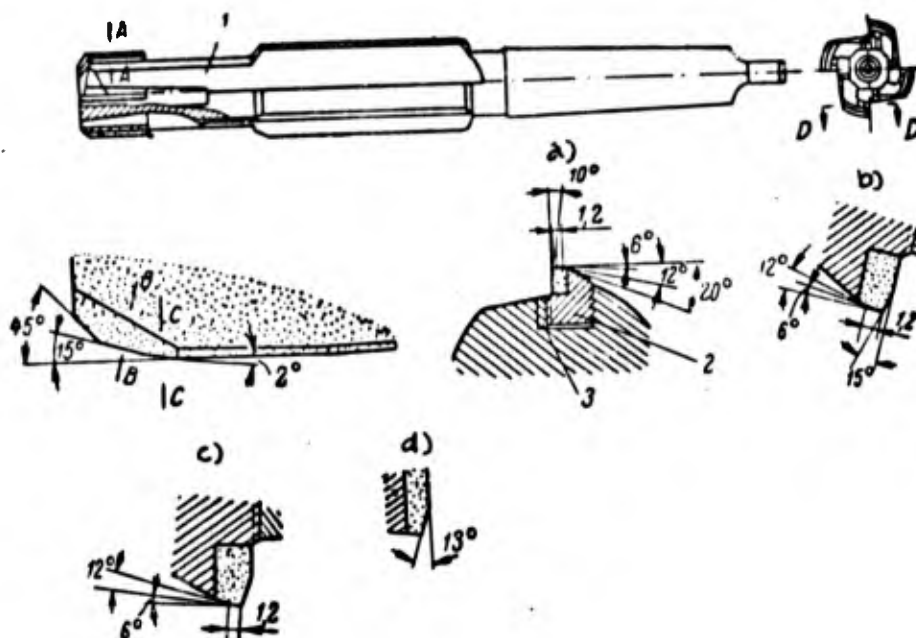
Carbide-Tipped Inserted-Blade Flute Reamers of Diameter $D = 25 - 50$ mm, With Rear Pilots and Taper Shank
